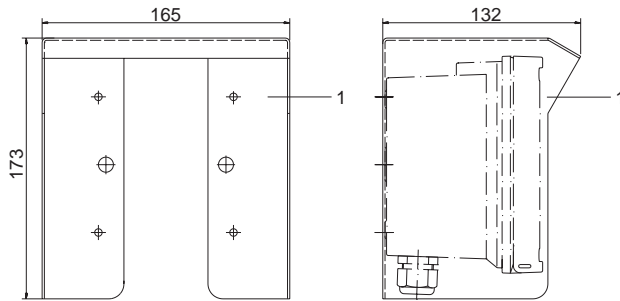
ZU 0276 protective hood for wall and pipe mounting
